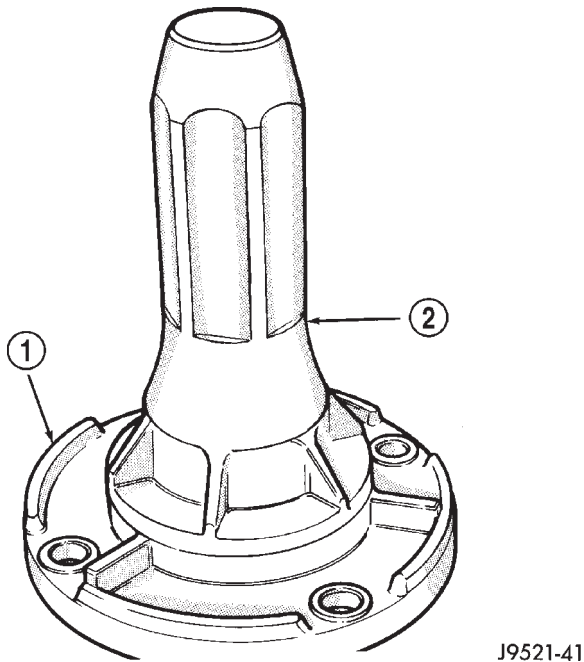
Install Input Gear Pilot Bearing 8001b777
